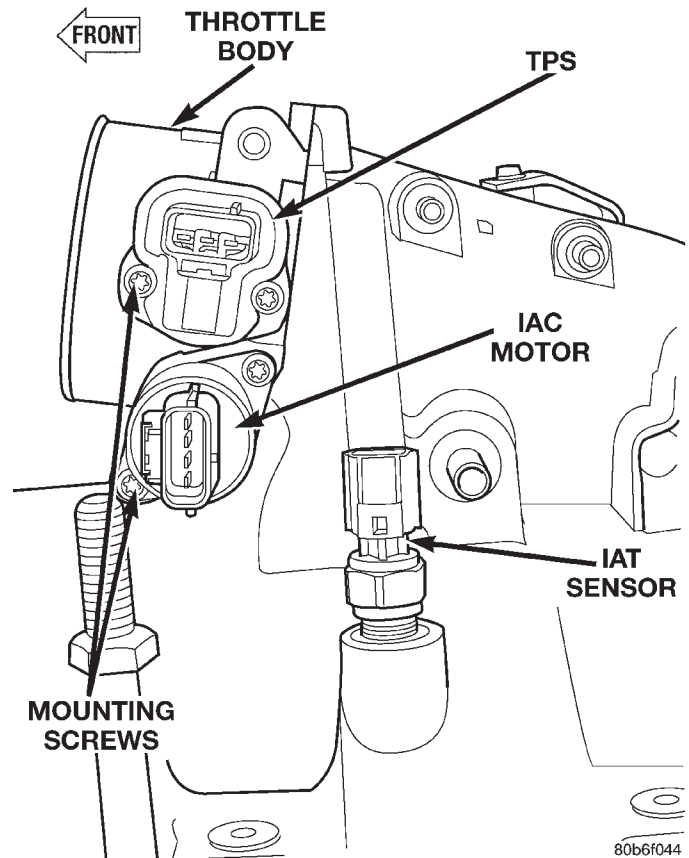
Intake Manifold Air Sensor Location—4.7L V-8 Engine
